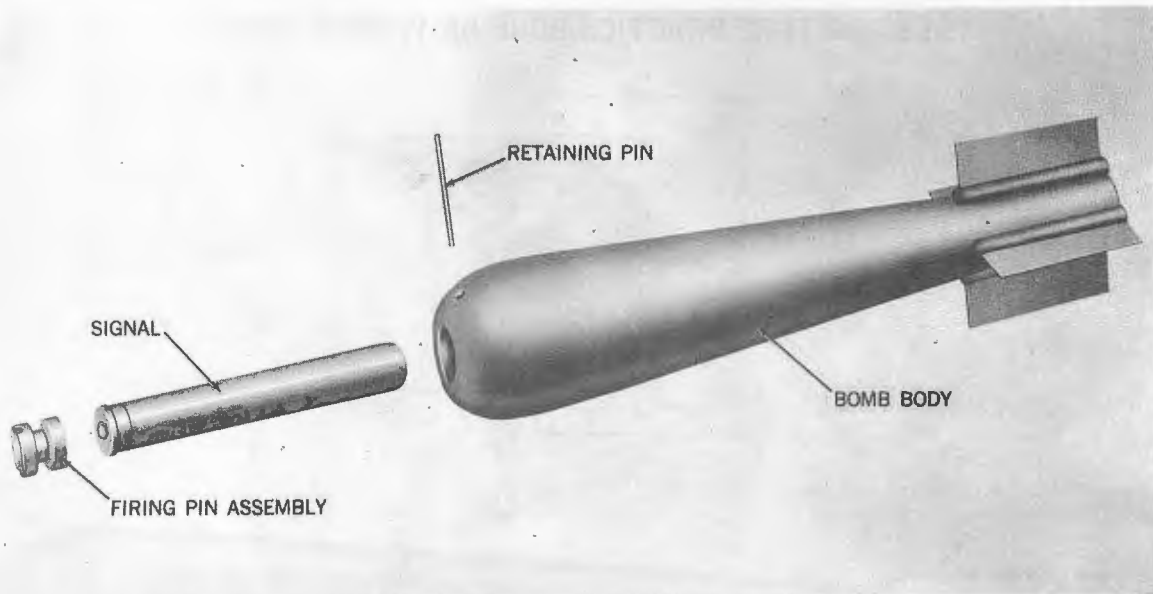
13-lb Miniature Practice Bomb Mk 19 Mod 1, Exploded View.
